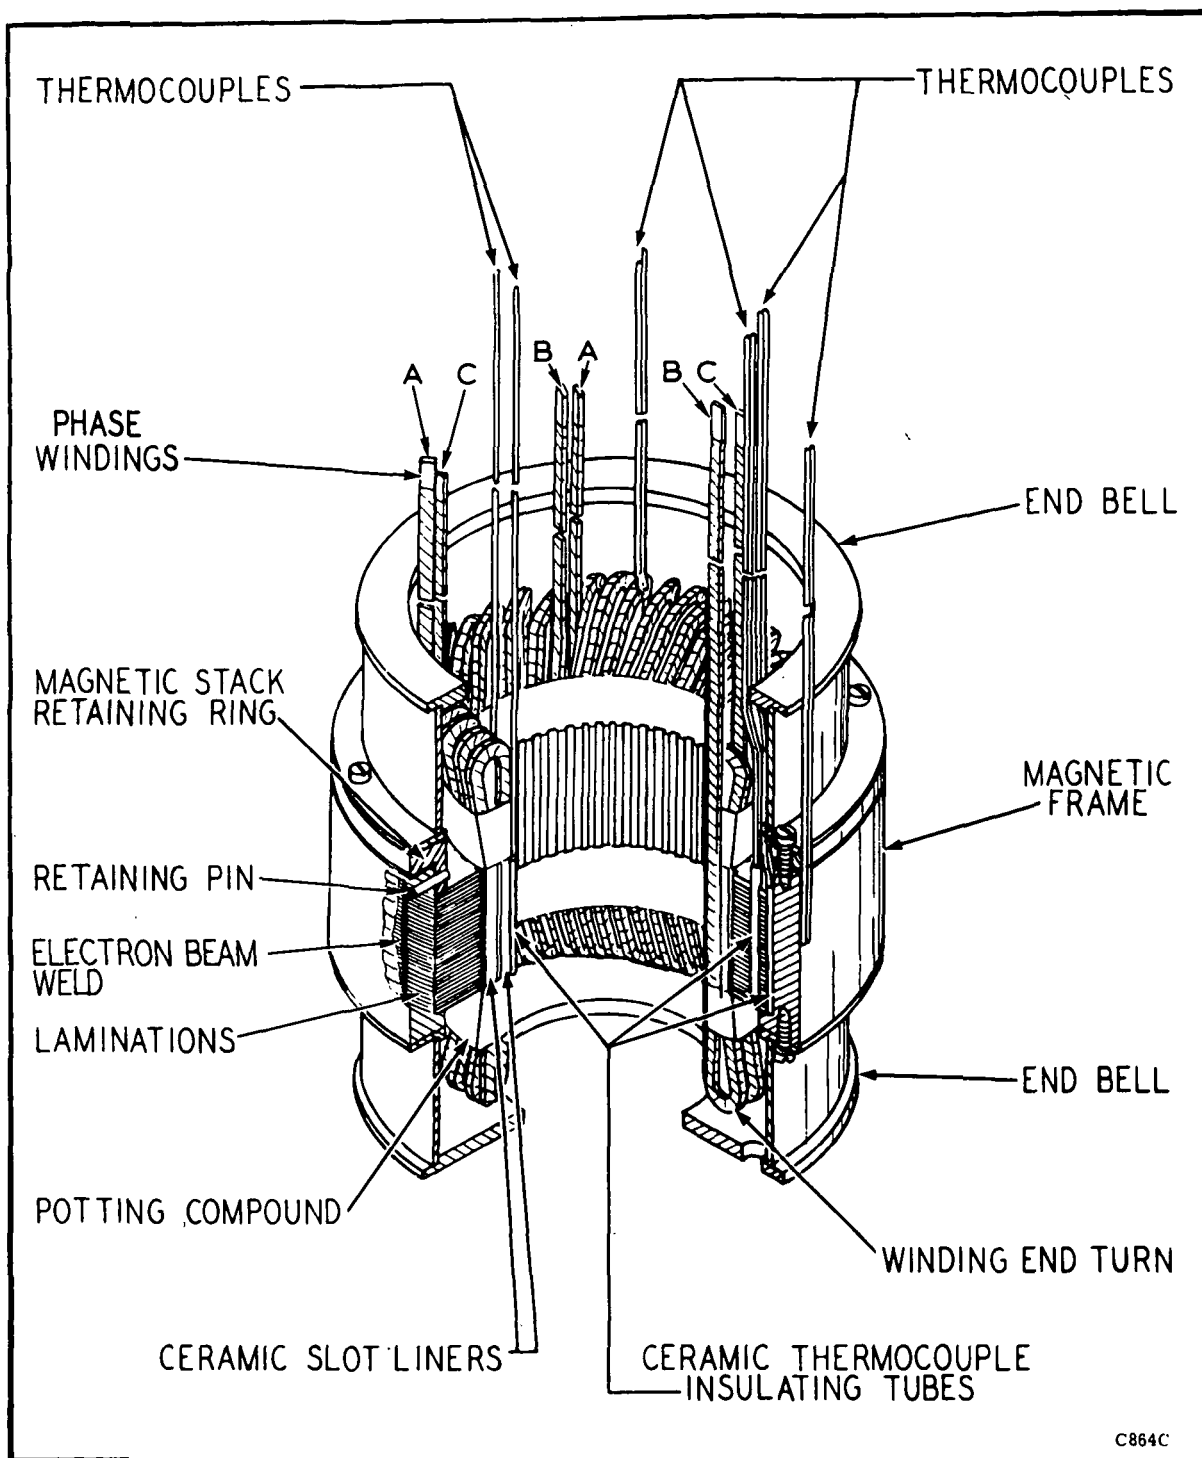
Cutaway View of Test Stator Without a Bore Seal
